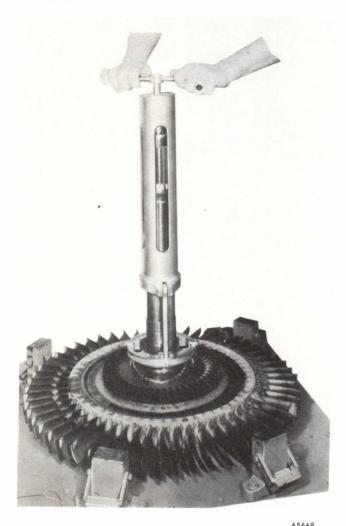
Removing the Turbine Cooling Vanes with Puller No. 3653 and Arm No. 3669
